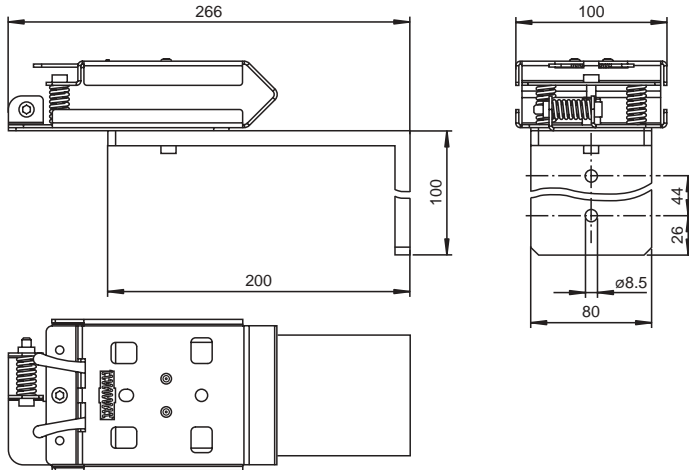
Mounting accessory OMH-LS610-01 for panel mounting
